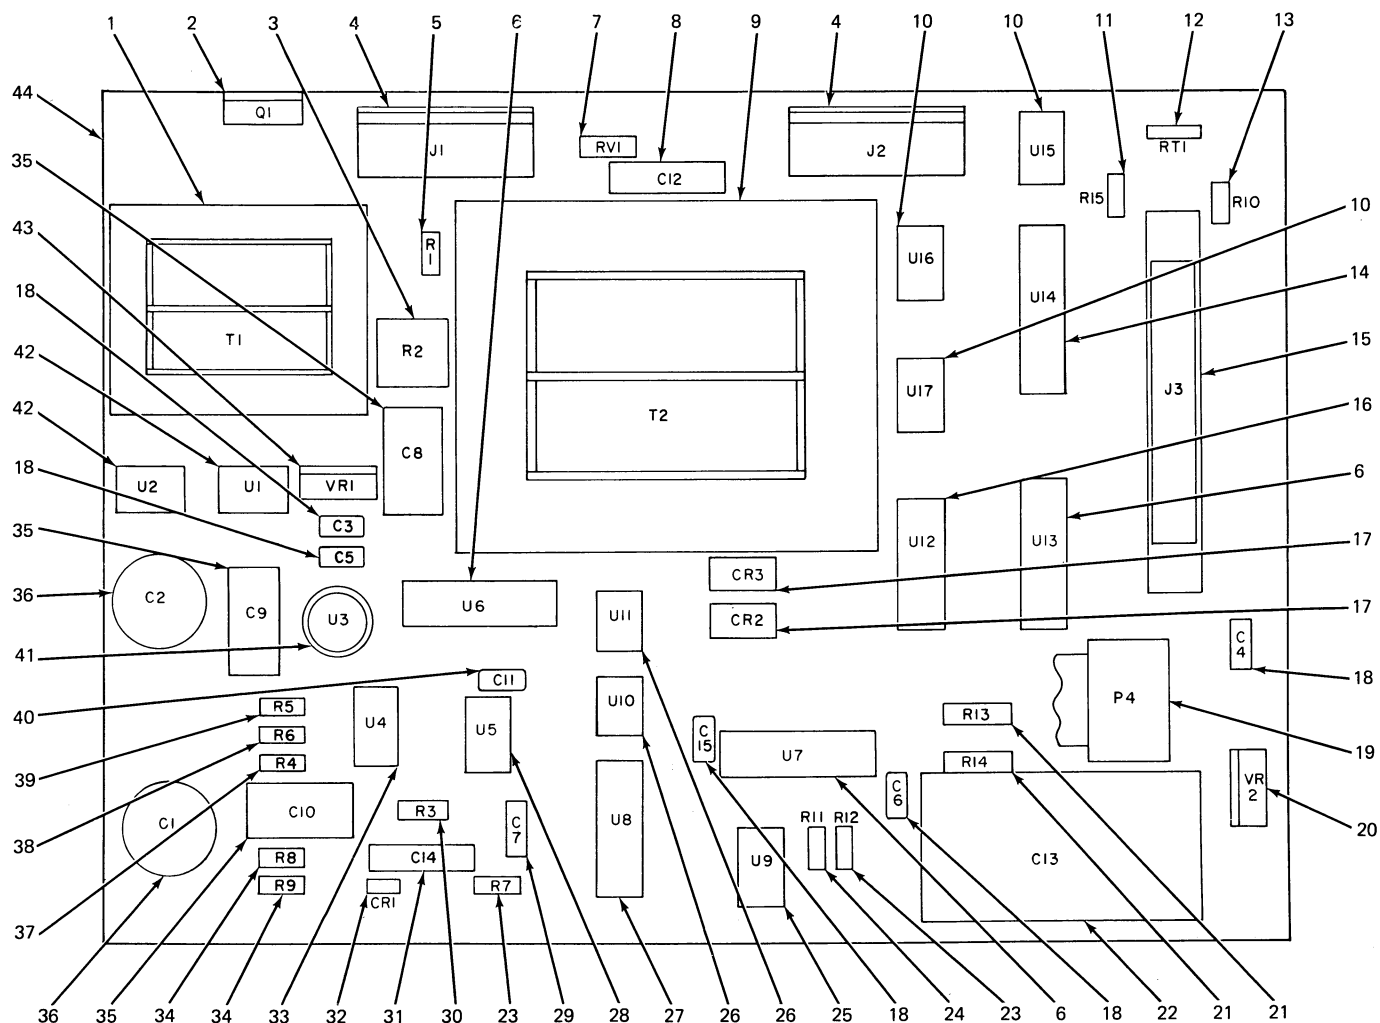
Power Supply Circuit Board Assembly, Parts Breakdown
